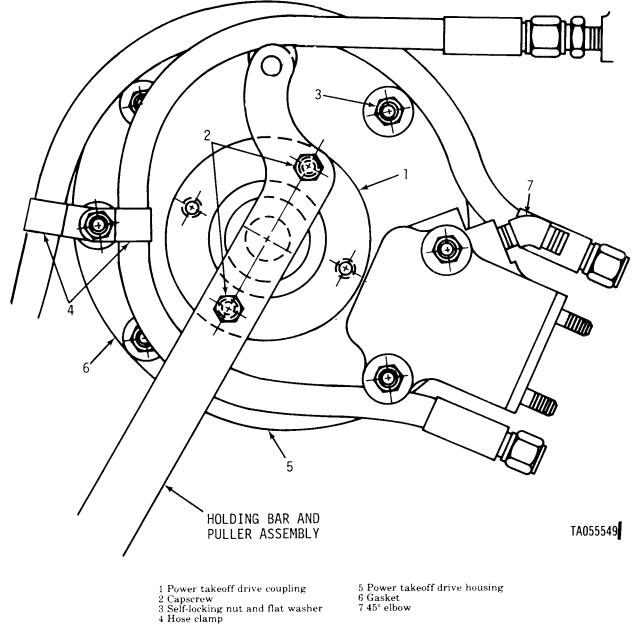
Removing power takeoff drive coupling and housing, model AVDS-1790-2DR engine.
